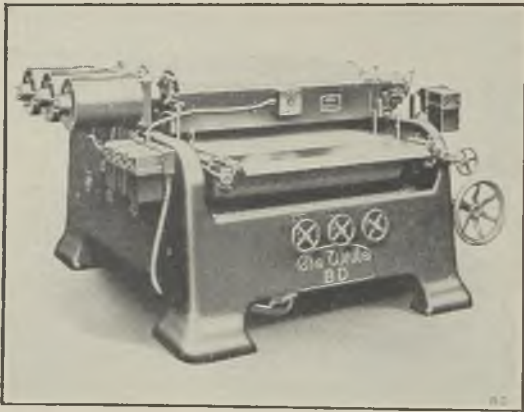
A TRIPLE DRUM SANDING MACHINE CONTAINING THE CHEEK CASTING SHOWN IN FIG. 3.
